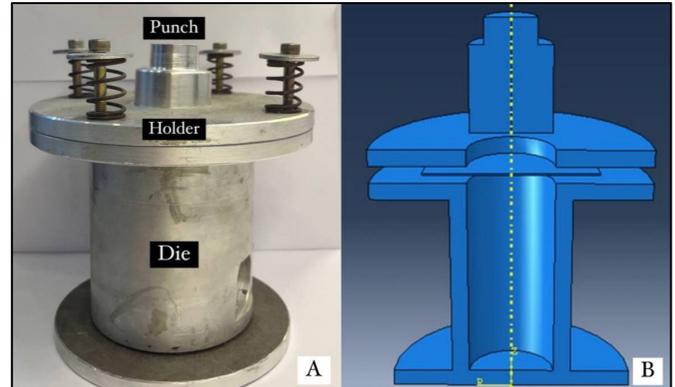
(A) Forming die, (B) Cross-section of a forming die with a CF-HDPE sheet sample.
